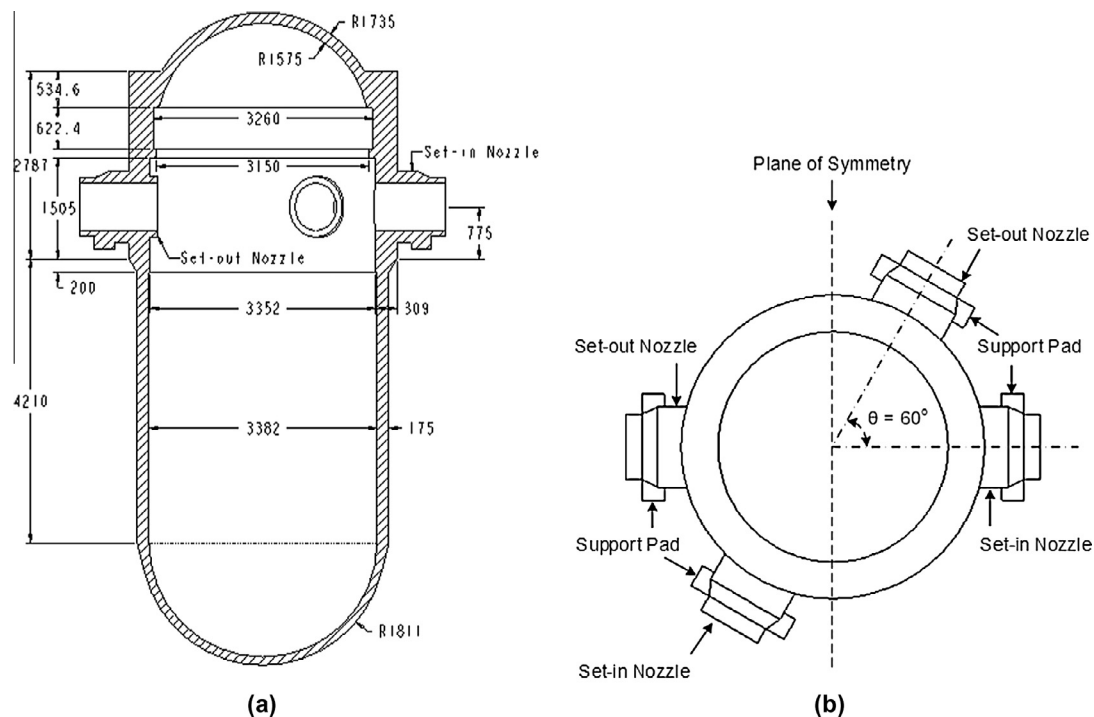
Engineering drawing of the RPV (a) cut-section view, all dimensions in mm, (b) top view.
